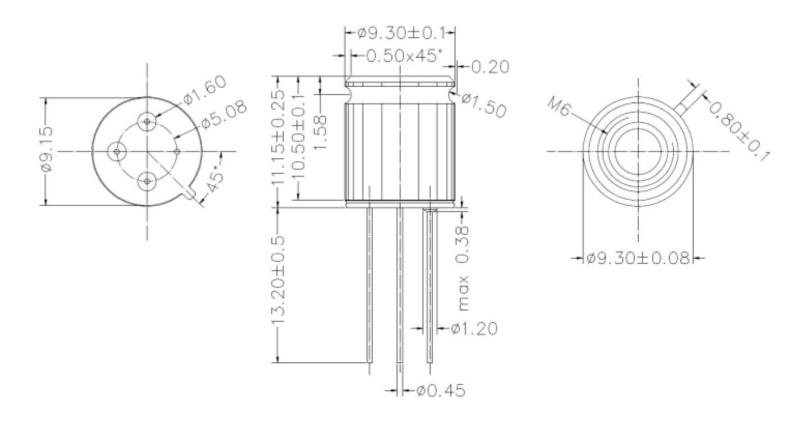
dimensional drawing of the HTPA16x4R1L3.6EA
